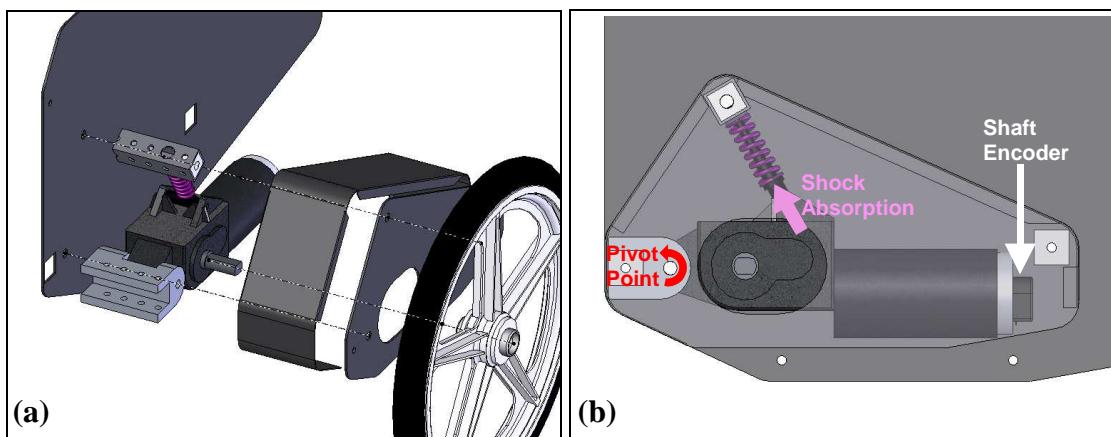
Left Motor Compartment (a) Exploded view (b) Side view
